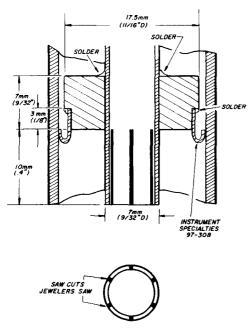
Close-up view of the fingerstock assembly. If brass shim stock is used instead of fingerstock, the size of the brass ring can be changed to compensate for the size difference.
